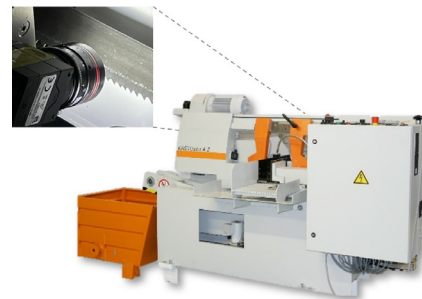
Kasto SBA2 bandsaw used for the experiments. The industrial camera FLIR BFS-U3-27S5M-C with dimensions 29x29x30 mm is mounted on the back side of the saw blade, which allows to capture and process images during machining. The exposure time is set to $20\mu\text{s}$ to limit motion blur.
